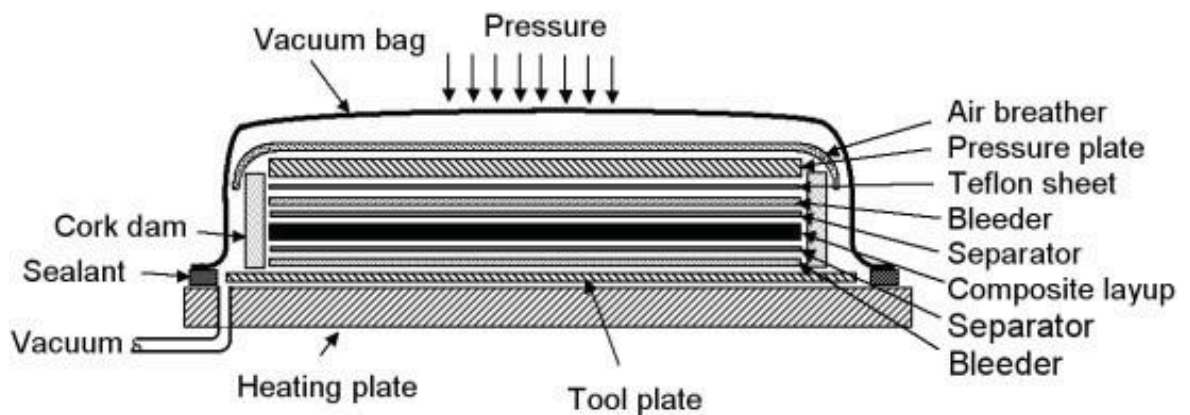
layup assembly for autoclave molding of composite laminates [2].
